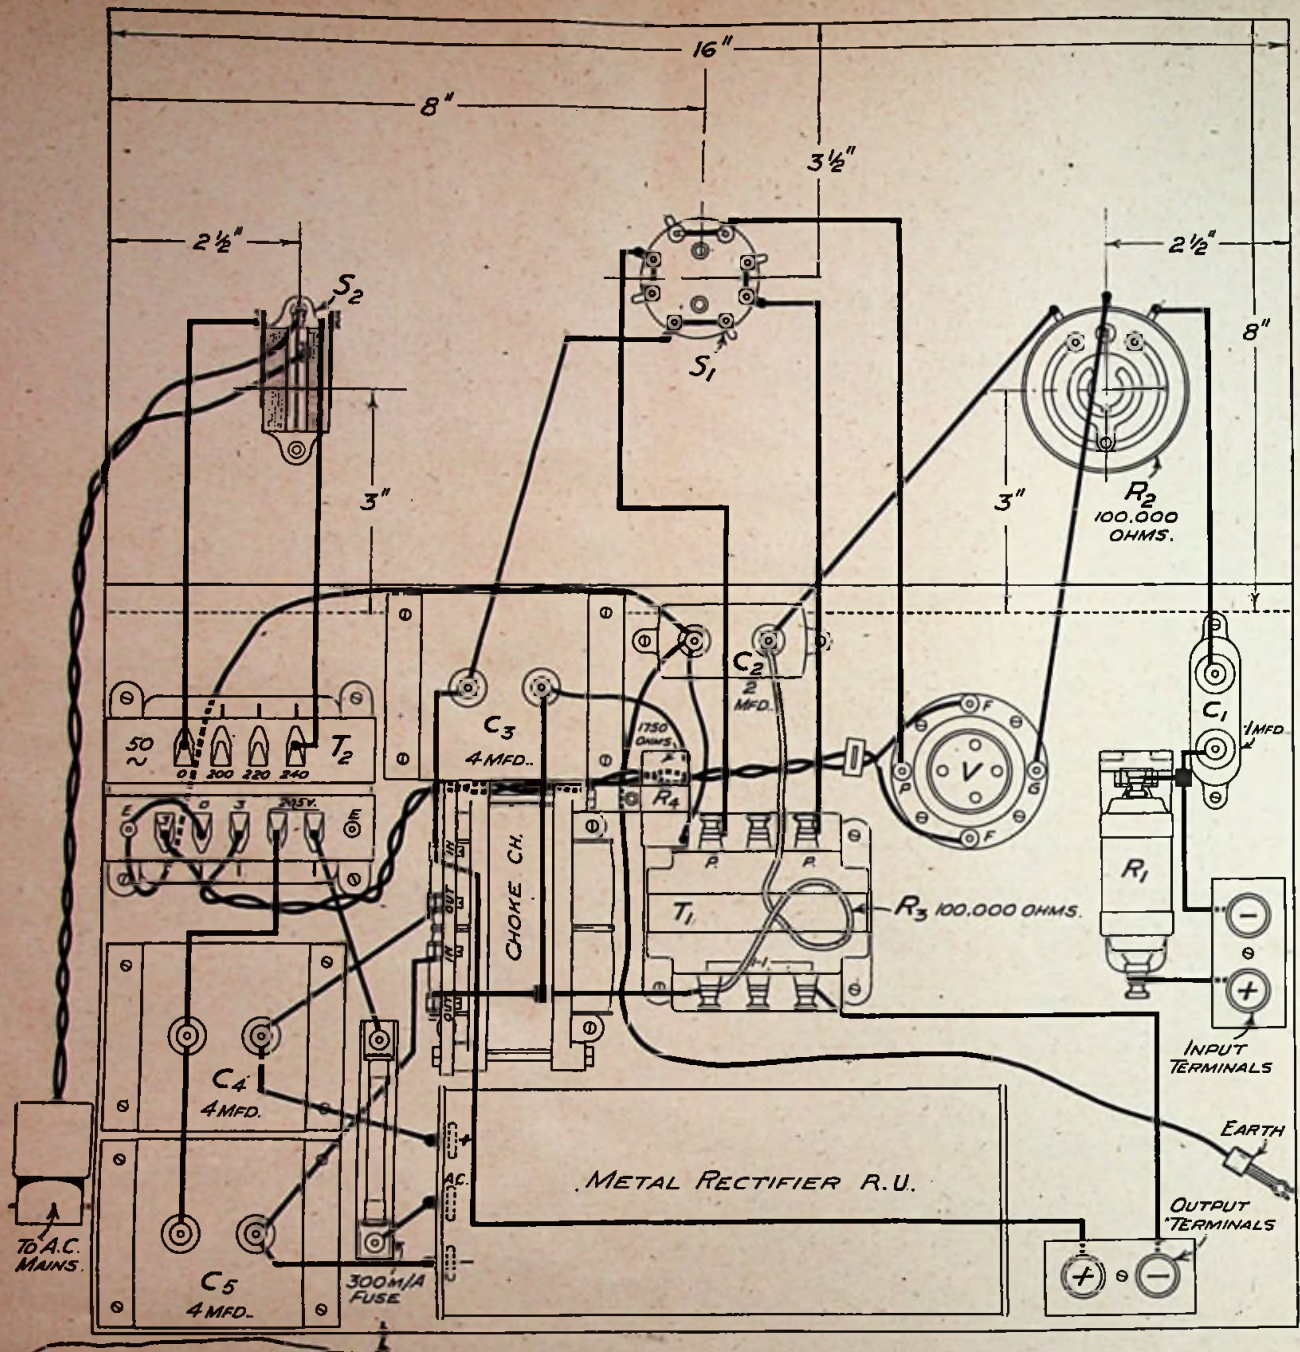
The complete panel and baseboard wiring diagram which should be followed exactly when wiring up the unit.
